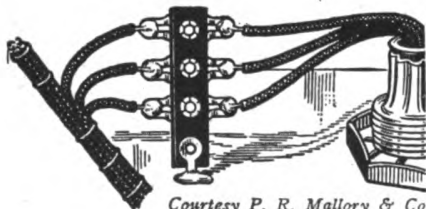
These several illustrations will explain how hook-up wire is attached mechanically to lugs or terminals. The contact must be made mechanically secure before solder is applied.
